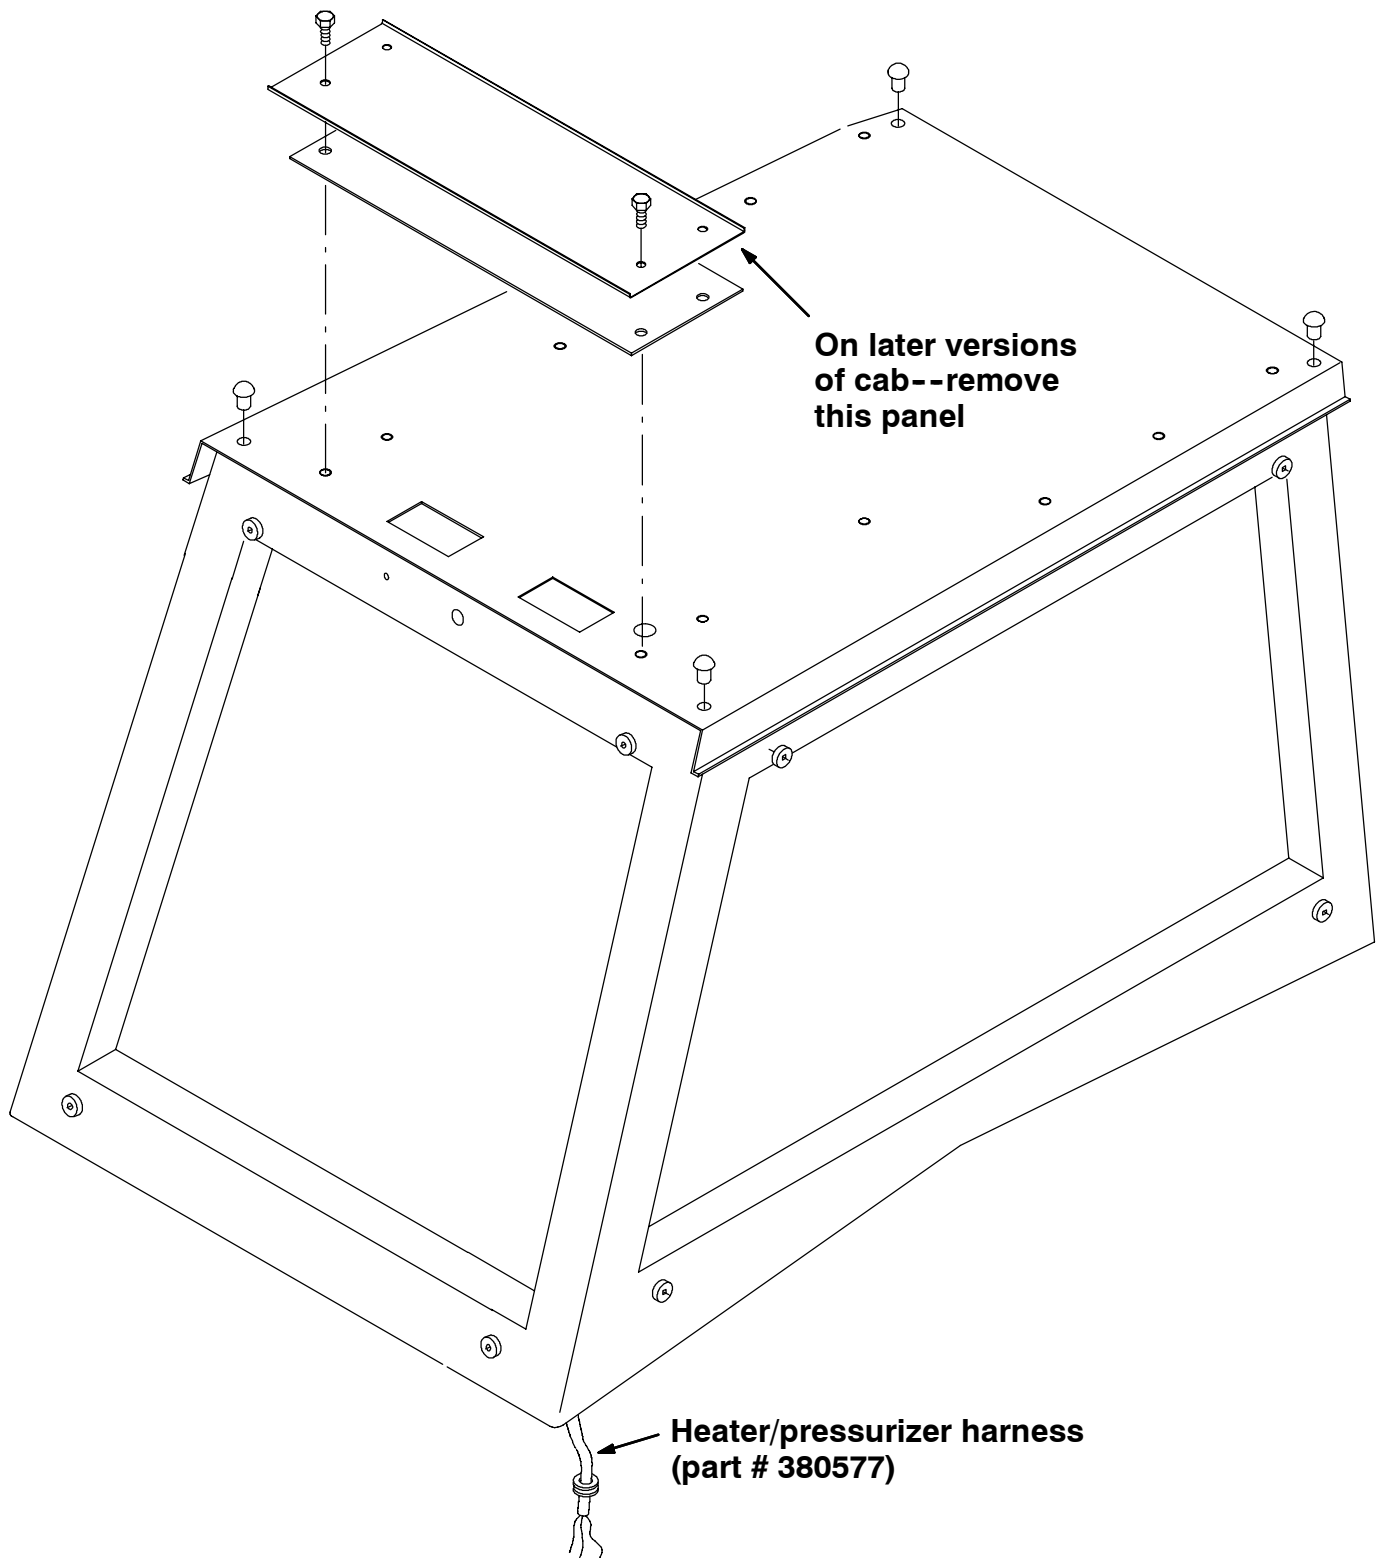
Cab And Heater/pressurizer Assembly (latest version of cab)
